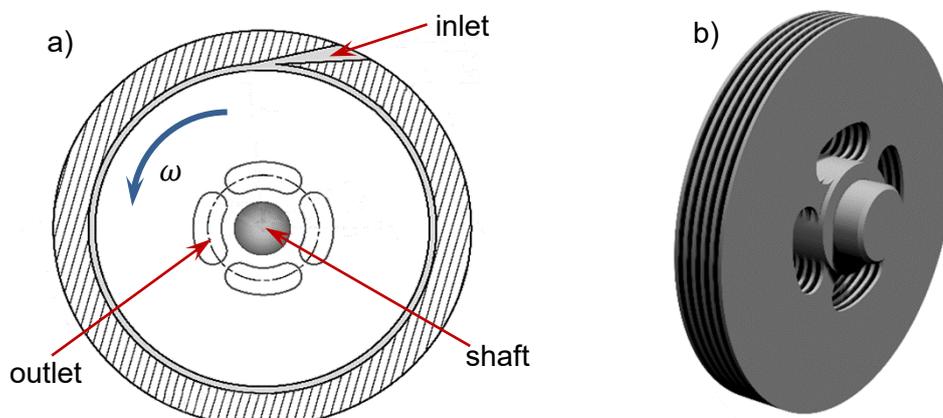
Tesla turbine: schematic view (a) and 3D view of rotor (b) – adapted after [10]
